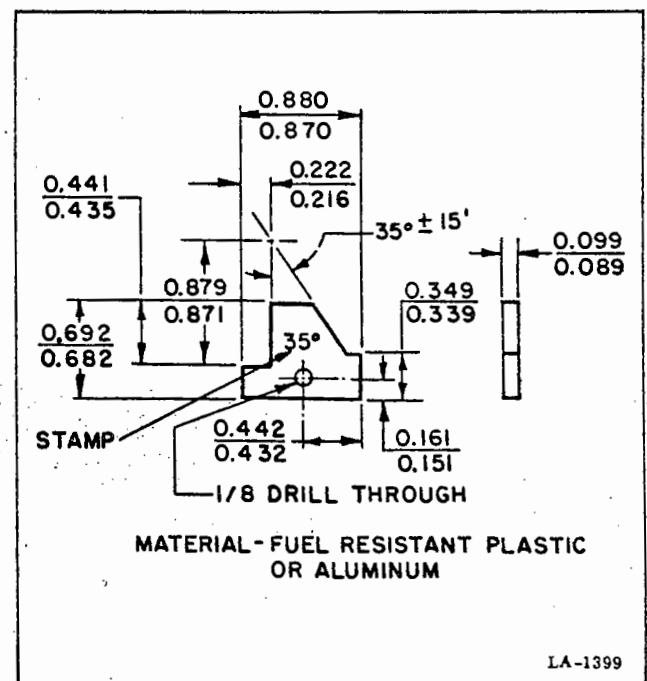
Dimensions for Manufacturing the T25939 Gage
